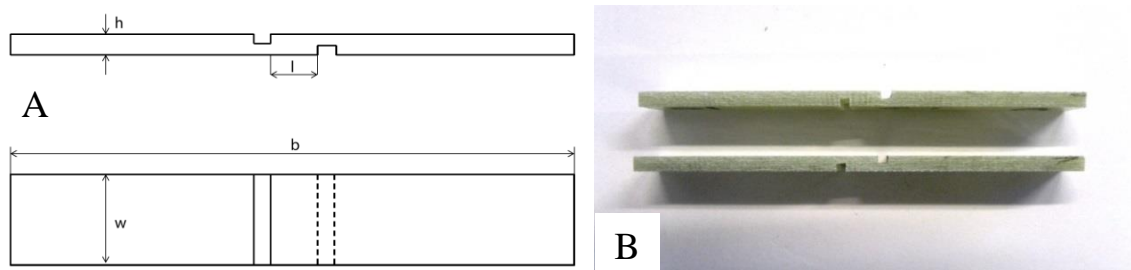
(A) ILSS sample drawing with dimensions (B) ILSS samples made out of GFRP with Palapreg-Eco resin
